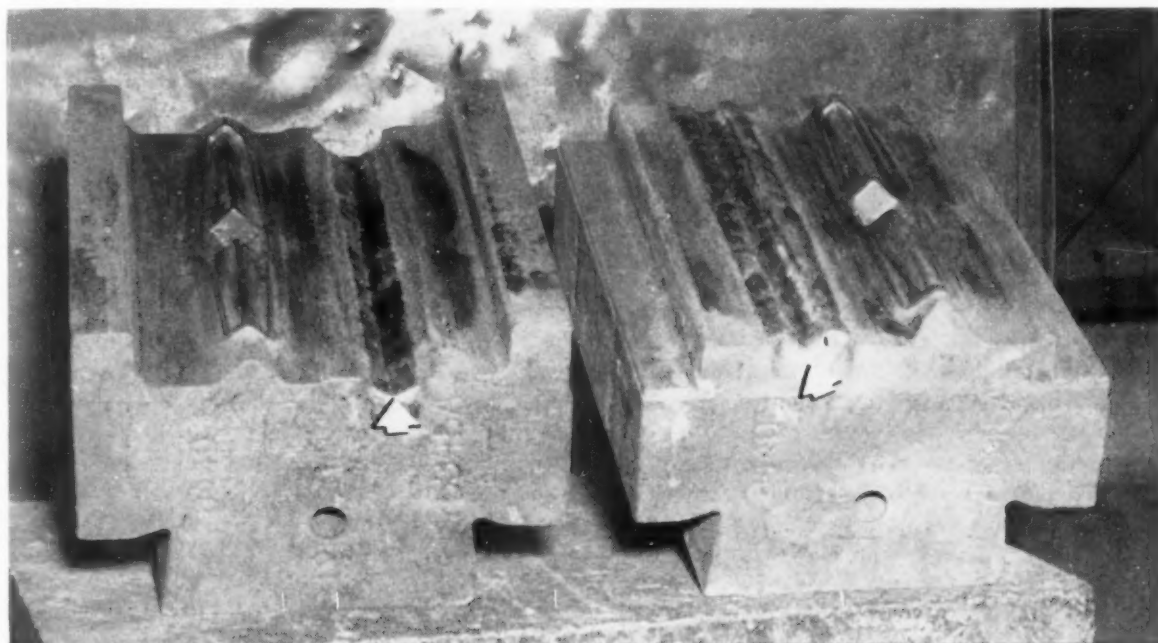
These forging dies have been built by metal arc welding.
